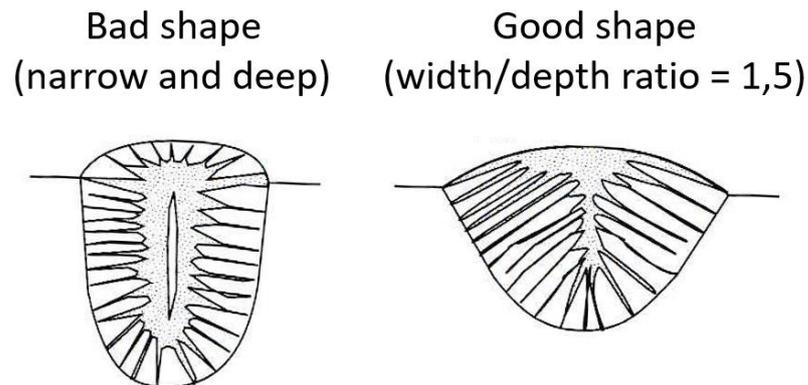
Illustration of weld cross sections in terms of preventing hot cracking. (Kyröläinen)
